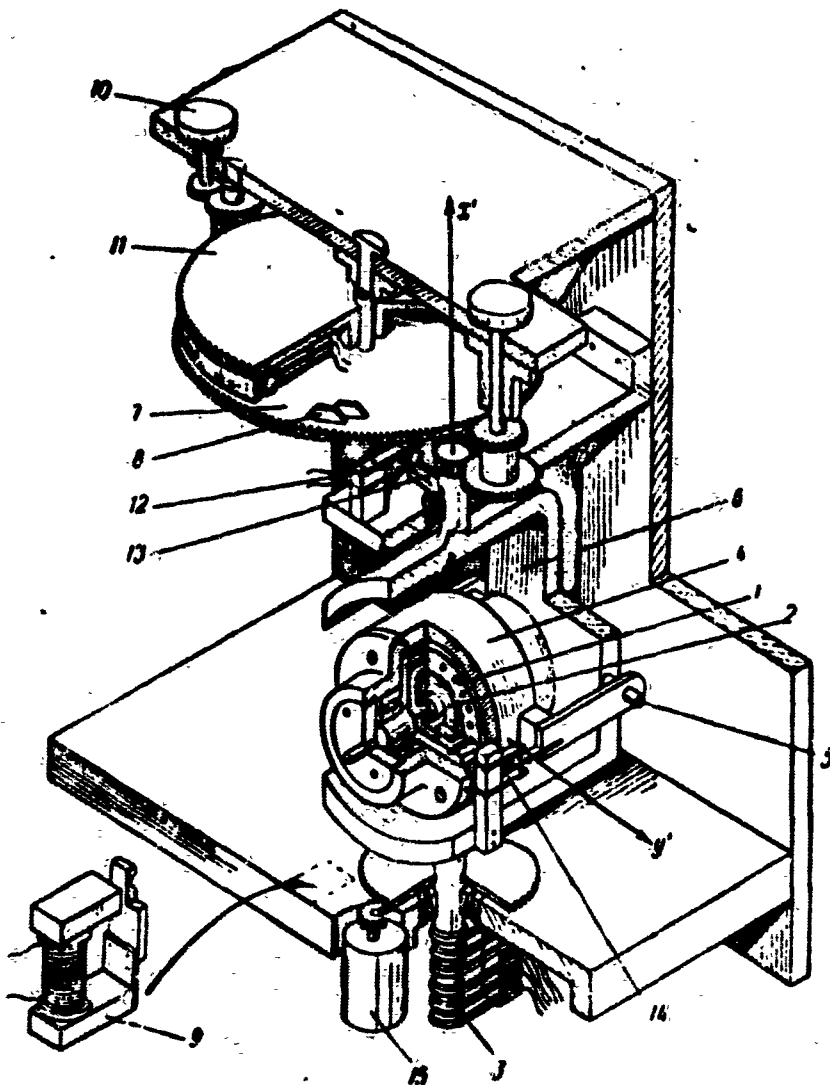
Structure of an integrator of overloads. 1 - gyro rotor; 2 - winding of stator; 3 - block with slide contacts; 4 - housing of rotor; 5 - axis of suspension of gyroscope; 6 - external bracket; 7 - disk; 8 - cams of engine cut-off; 9 - arrester; 10 - dial for adjusting distance; 11 - disk; 12, 13 - contacts adjusting zero point; 14 - contacts of correction; 15 - motor of correction.
